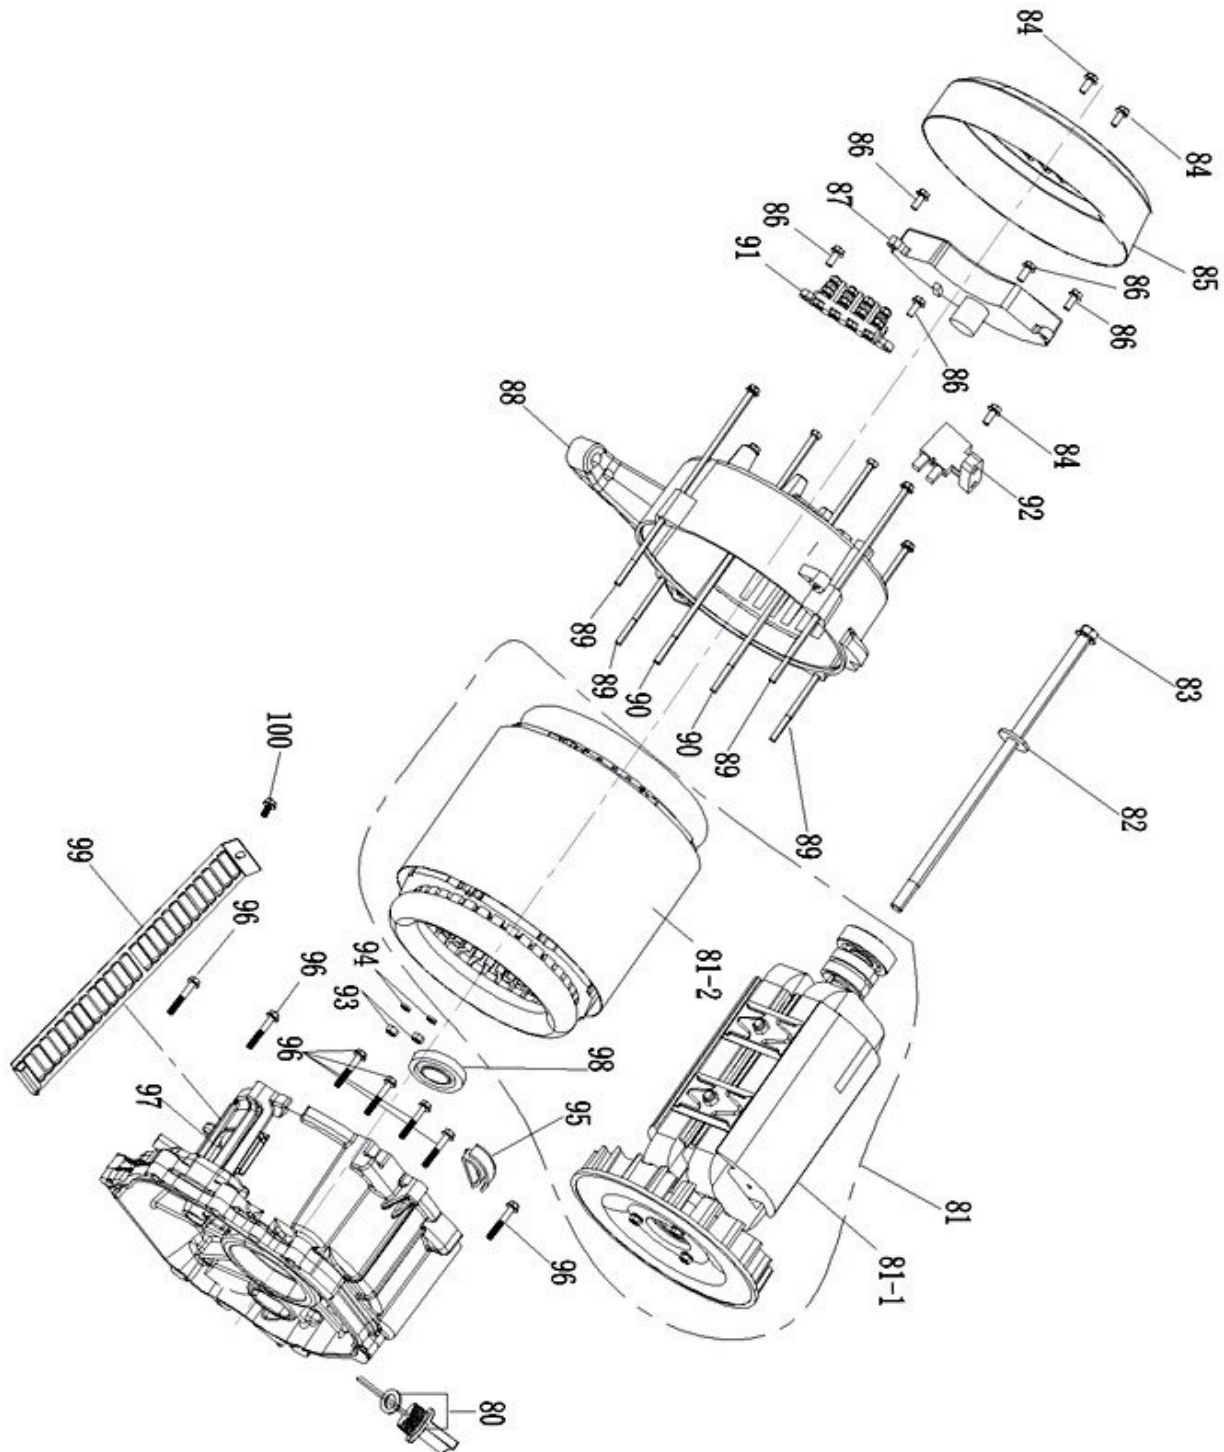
Spare parts drawing 3 PG-E 60 SEA, PG-E 80 TEA and PG-E 90 SEA
